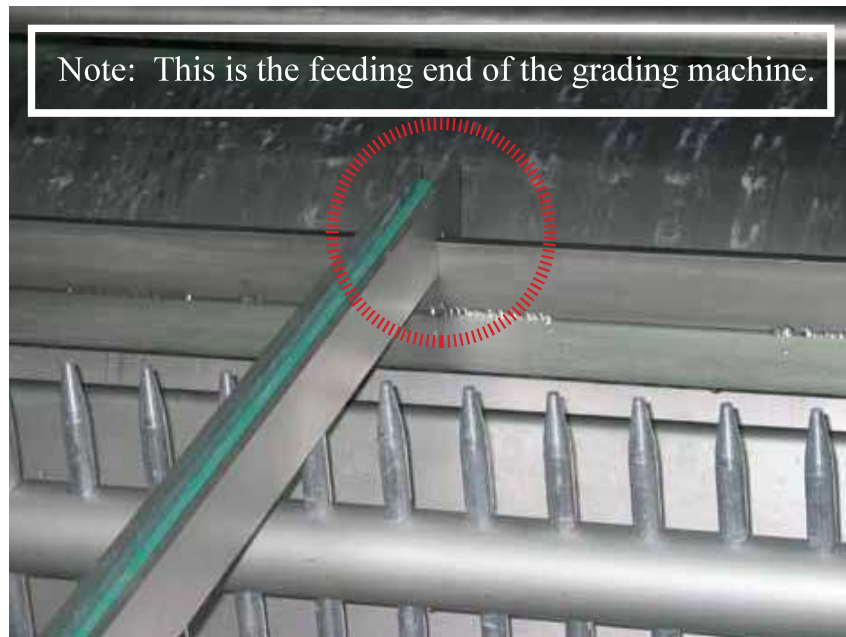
d. Here we can see how the first adjusting bar is installed in the grading machine. A small plate is fastened to the ends of the bars that is then installed on top of the slotted flat bar and bolted in.
